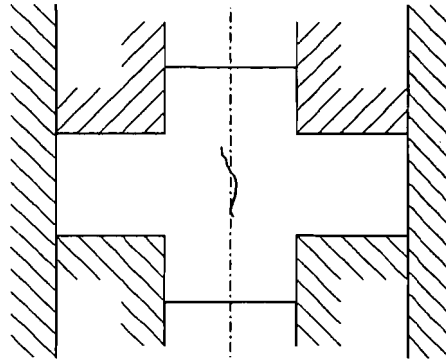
ζ -Crack, an internal crack which occurs in multiaxial extrusion processes.
